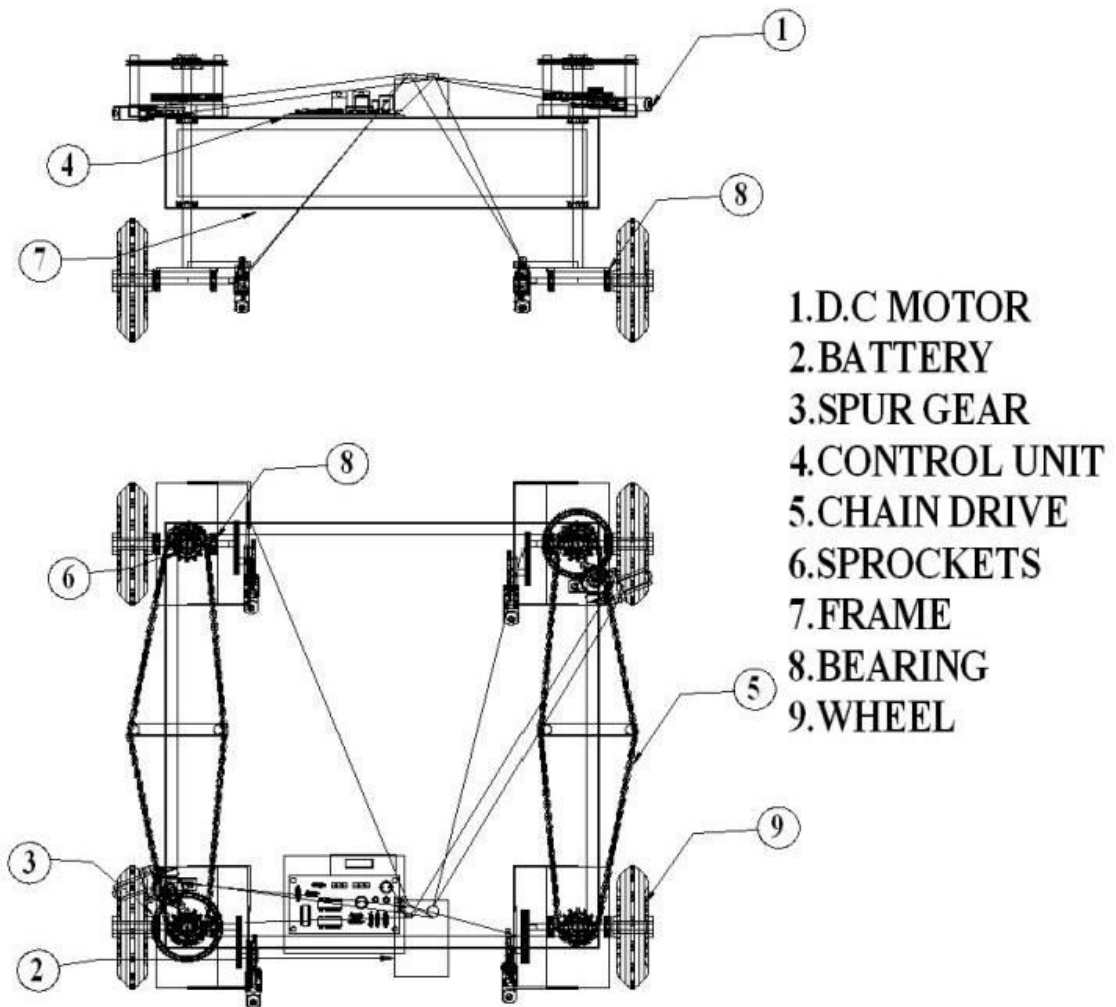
DESIGN OF 90 DEGREE TURNING MECHANISM
